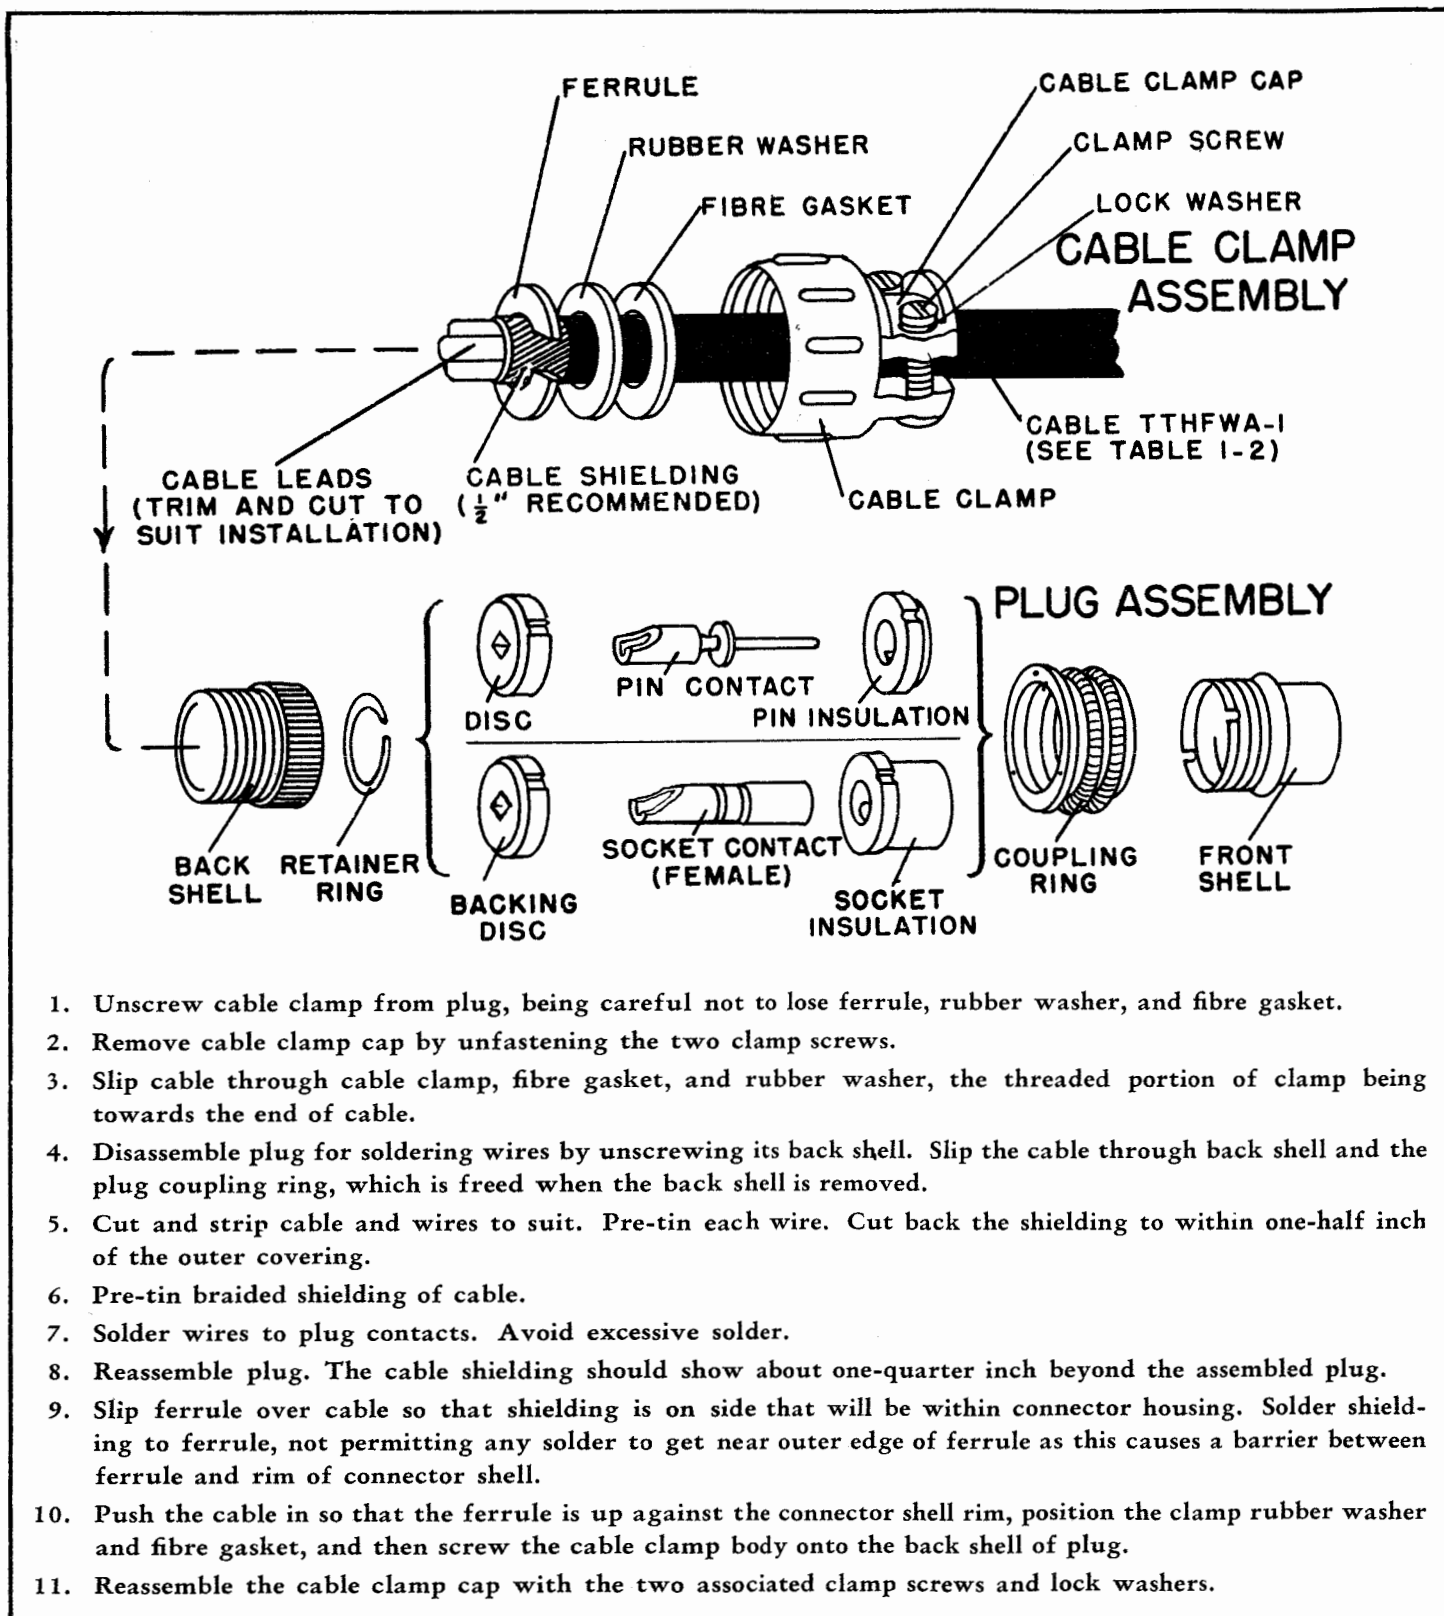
Cable Fabrication Instructions, Multi-Conductor Cable
